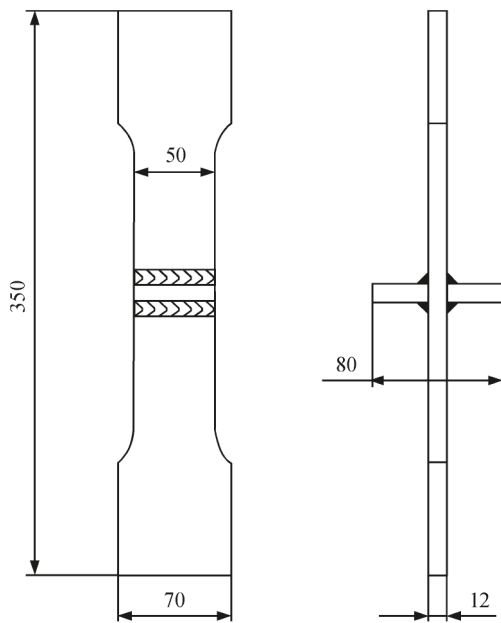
Shapes and geometrical dimensions of specimens of T-welded joint
